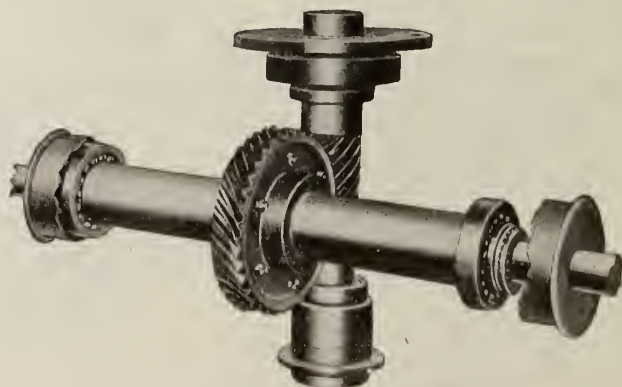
DRIVE SHAFTS AND WORM GEAR ARRANGEMENT OF KEK MILL
